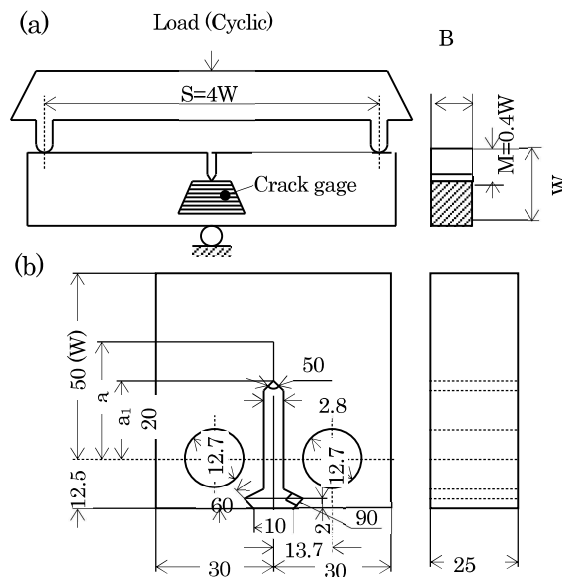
Schematic drawing of test specimen for fatigue crack propagation test.
